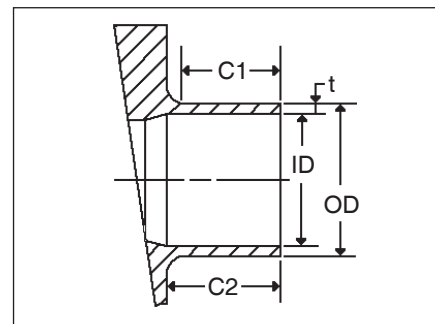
Opt-24 Butt Weld End Connection
